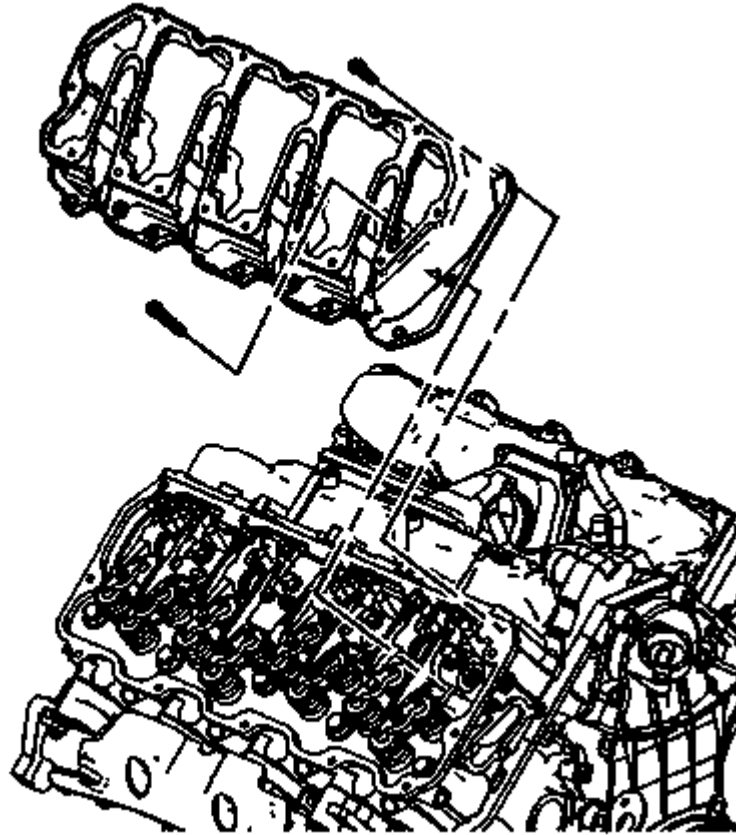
View Of Lower Valve Rocker Arm Cover (Right)
